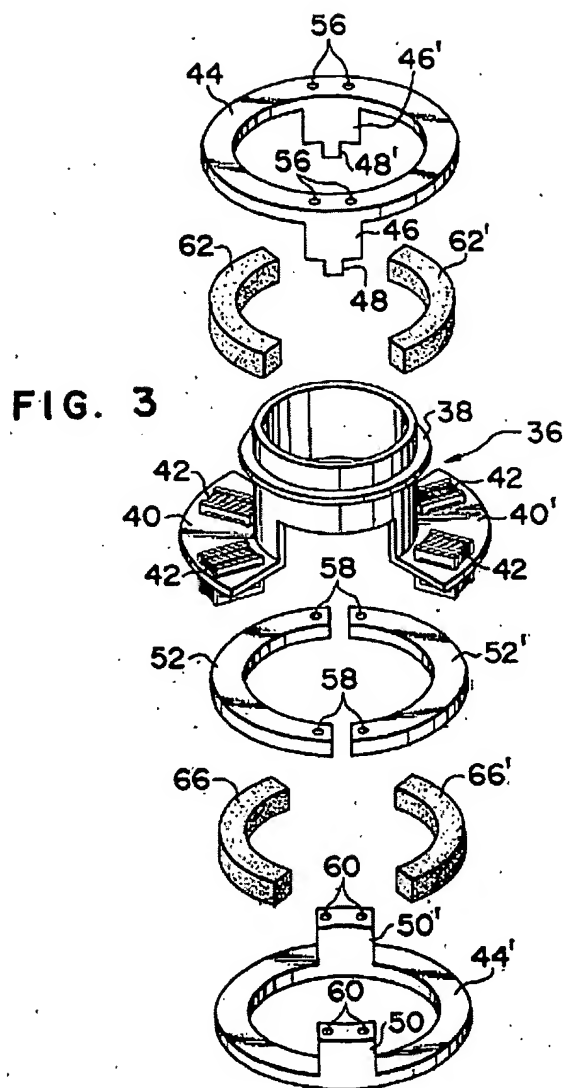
is “an exploded perspective view showing the rotary motion arrangement in a dissembled form” (Koike, col. 3, ll. 17-18).
